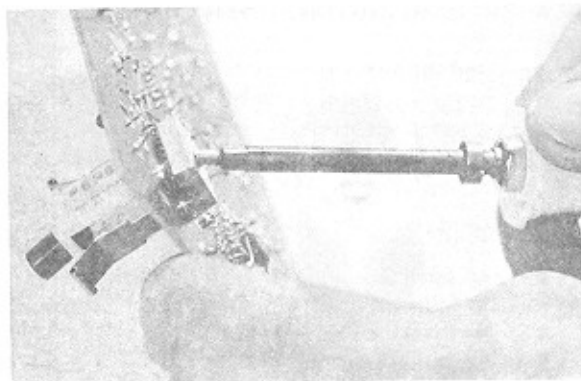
SPECIAL IRON TIP HEATS ALL IC PINS AT ONCE WHILE SPRING-LOADED REMOVAL TOOL LIFTS IC FROM BOARD
